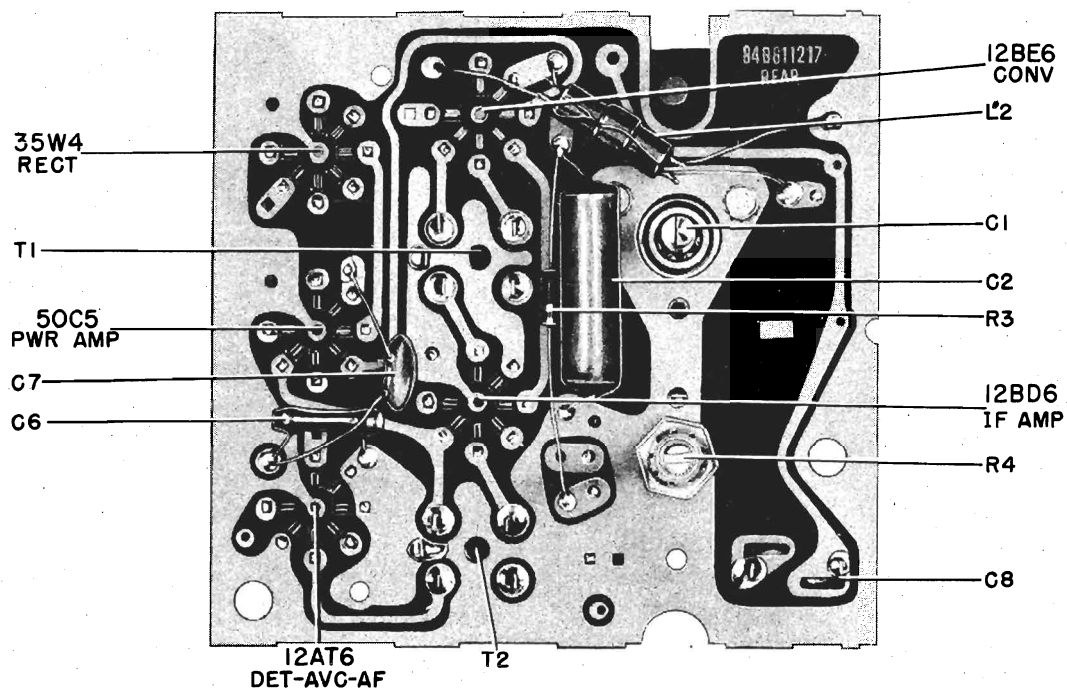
REAR VIEW OF CHASSIS (EARLY MODEL)
